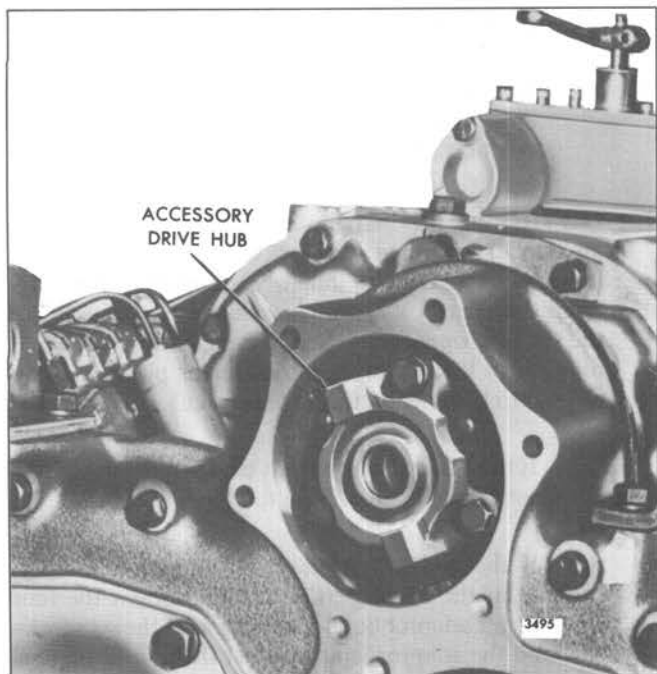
Accessory Drive Attached to Blower Drive Gear
